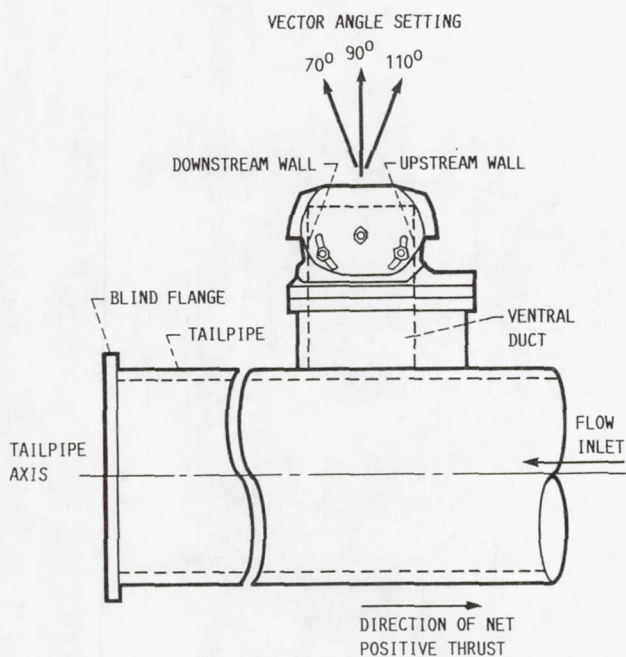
SWIVEL NOZZLE AND TAILPIPE ASSEMBLY.
